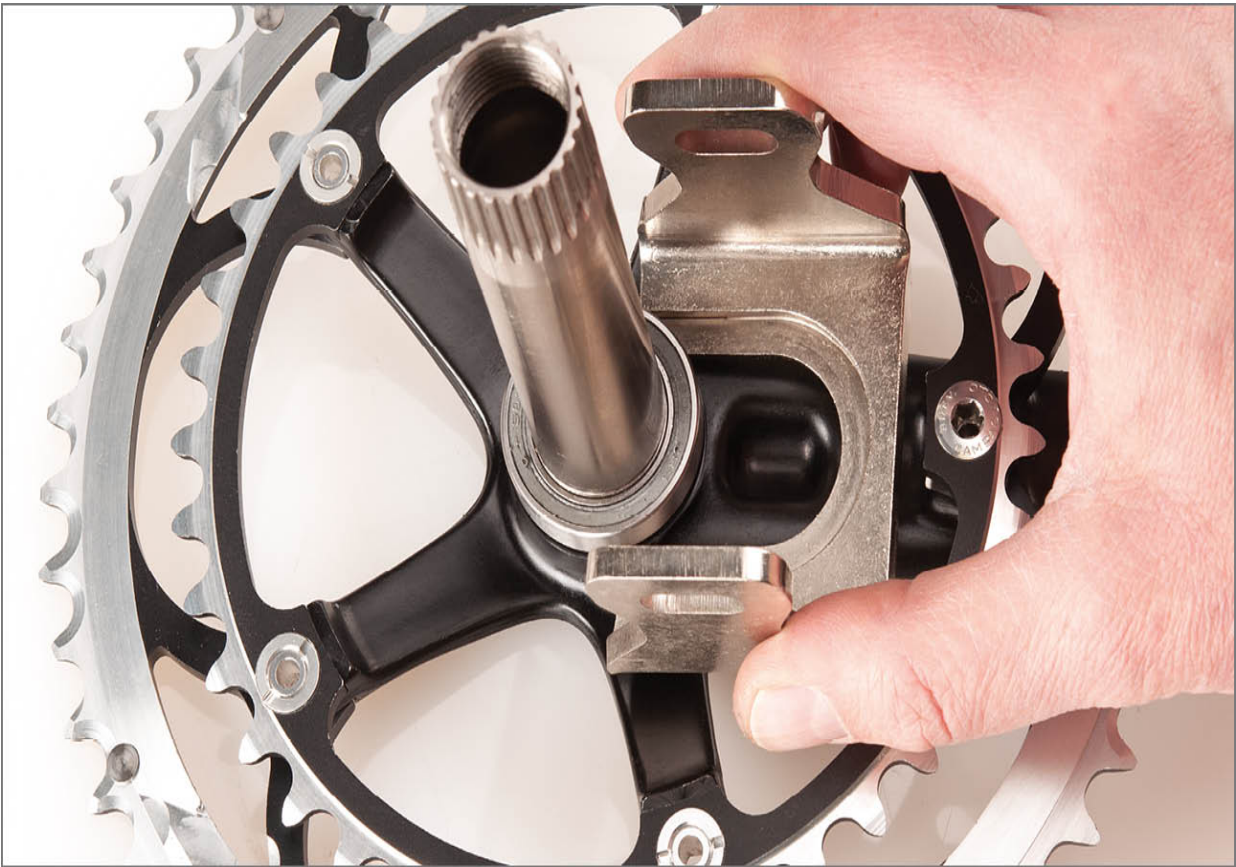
Install bearing adaptor from direction of crank arm
